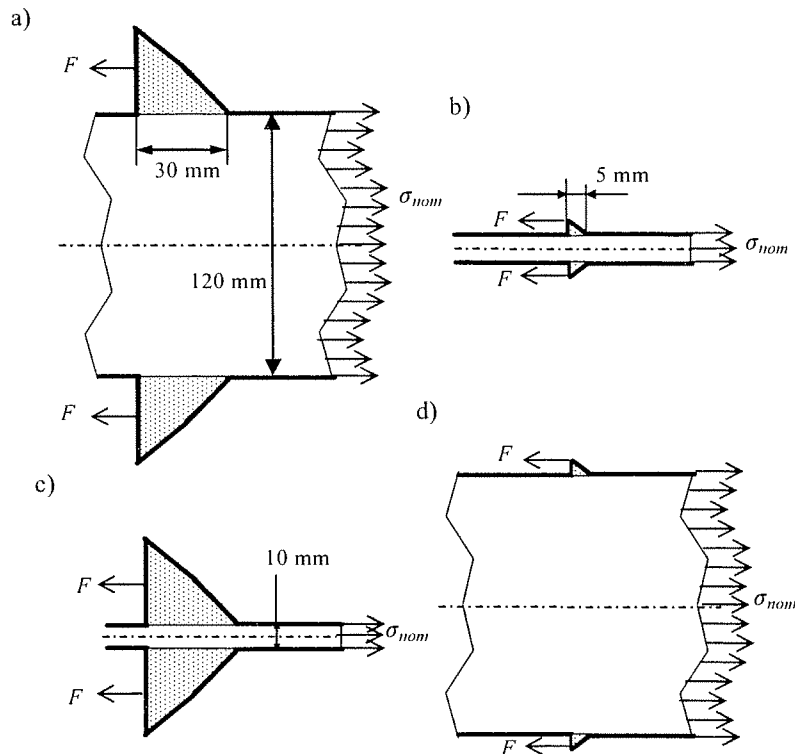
Weld size and load variation for two plate thicknesses and two weld sizes. ($l_w = 5$ mm or 30 mm; $T = 10$ mm or 120mm).
